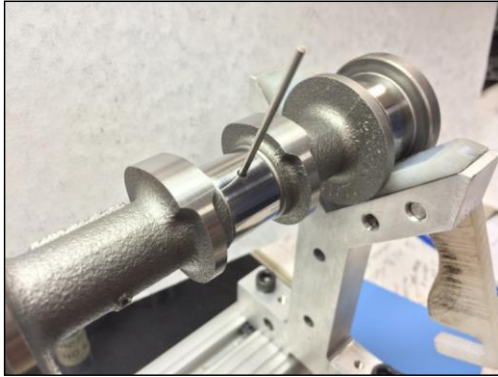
Measuring Oil Feed Hole Diameters Using a Pin Gage
